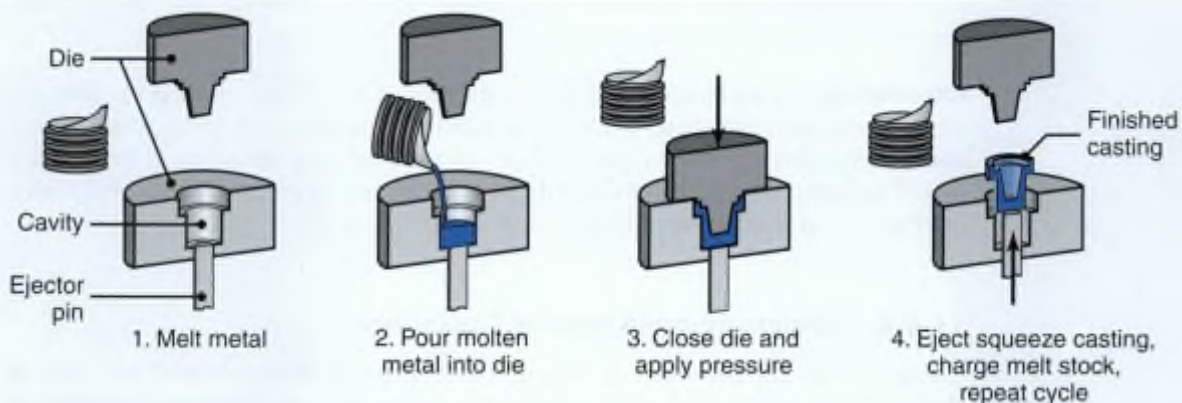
Sequence of operations in the squeeze-casting process; this process combines the advantages of casting and forging.
